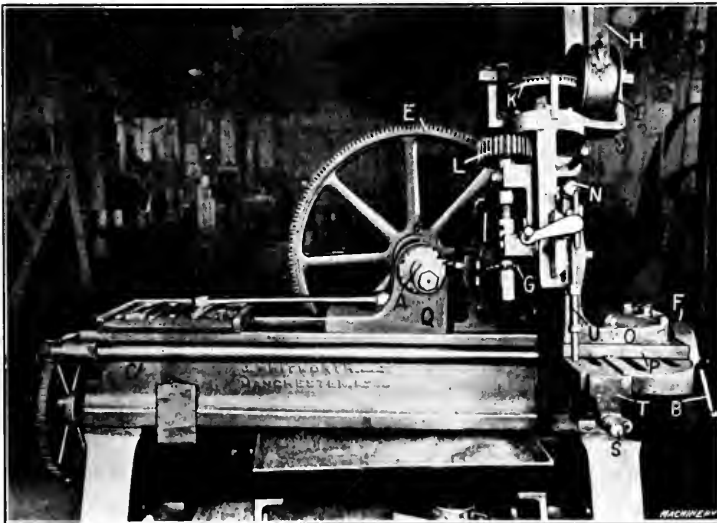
Gear-cutting Machine built by J. W. Whitworth & Co., Manchester, England
